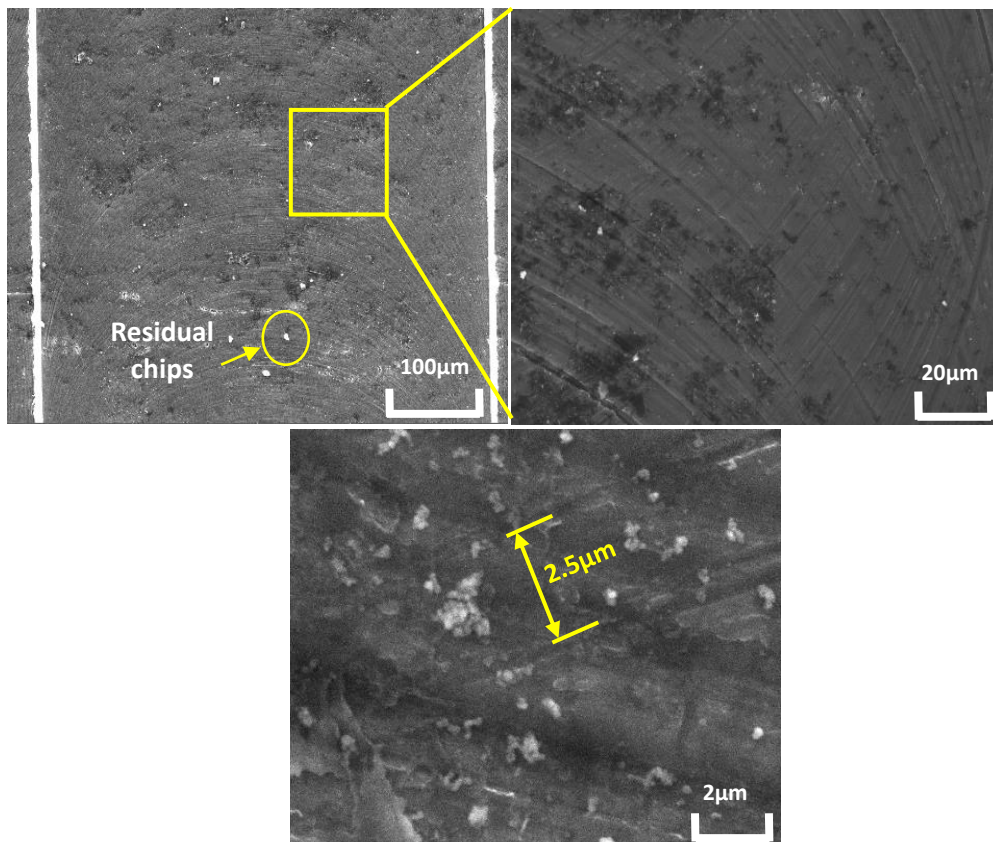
SEM micrographs of machined surface for Mg/2.5 wt.% BN at feed per tooth of 1μm/tooth, spindle speed of 6,000rpm and depth of cut of 30 μm.
